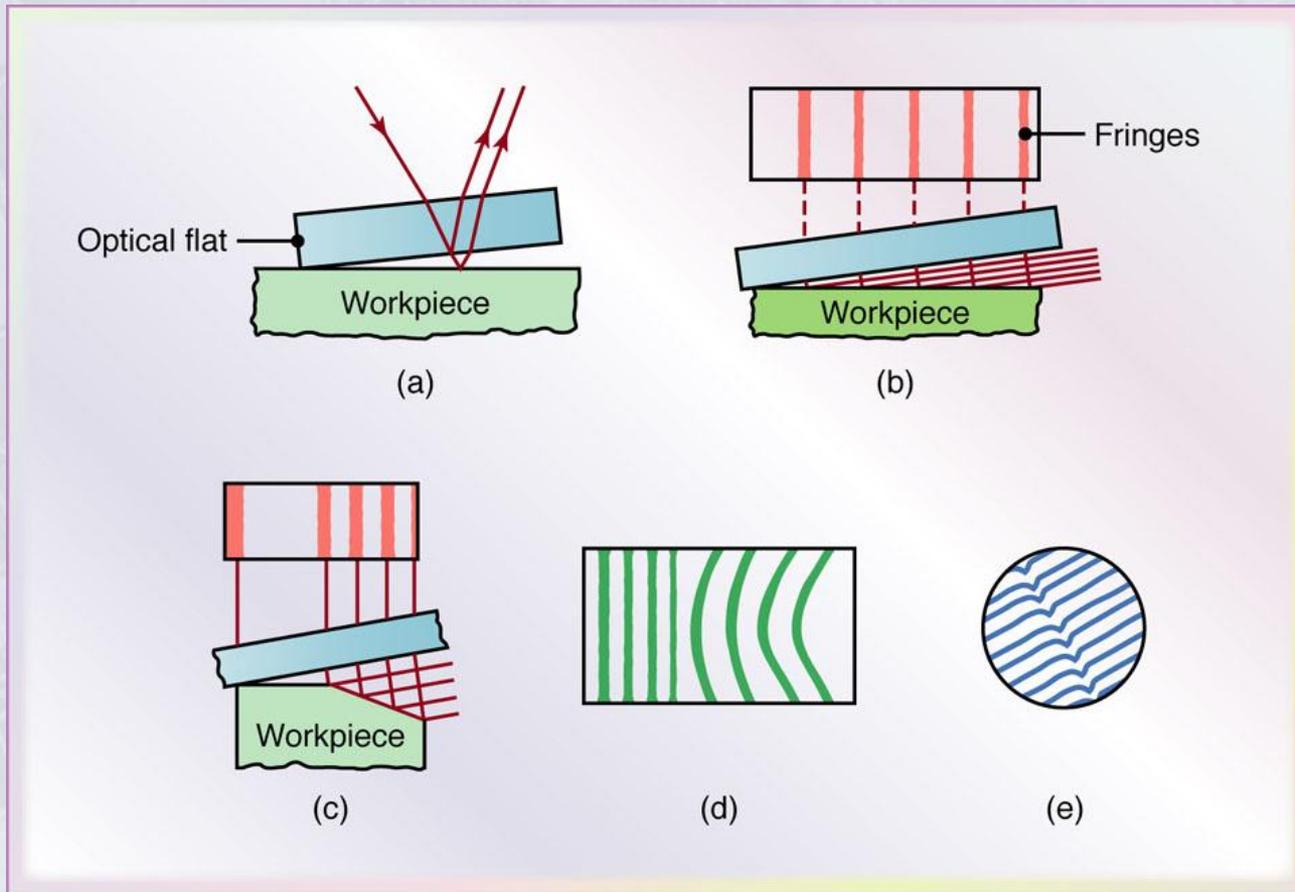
(a) Interferometry method for measuring flatness using an optical flat. (b) Fringes on a flat, inclined surface. An optical flat resting on a perfectly flat workpiece surface will not split the light beam, and no fringes will be present. (c) Fringes on a surface with two inclinations. *Note:* the greater the incline, the closer together are the fringes. (d) Curved fringe patterns indicate curvatures on the workpiece surface.
